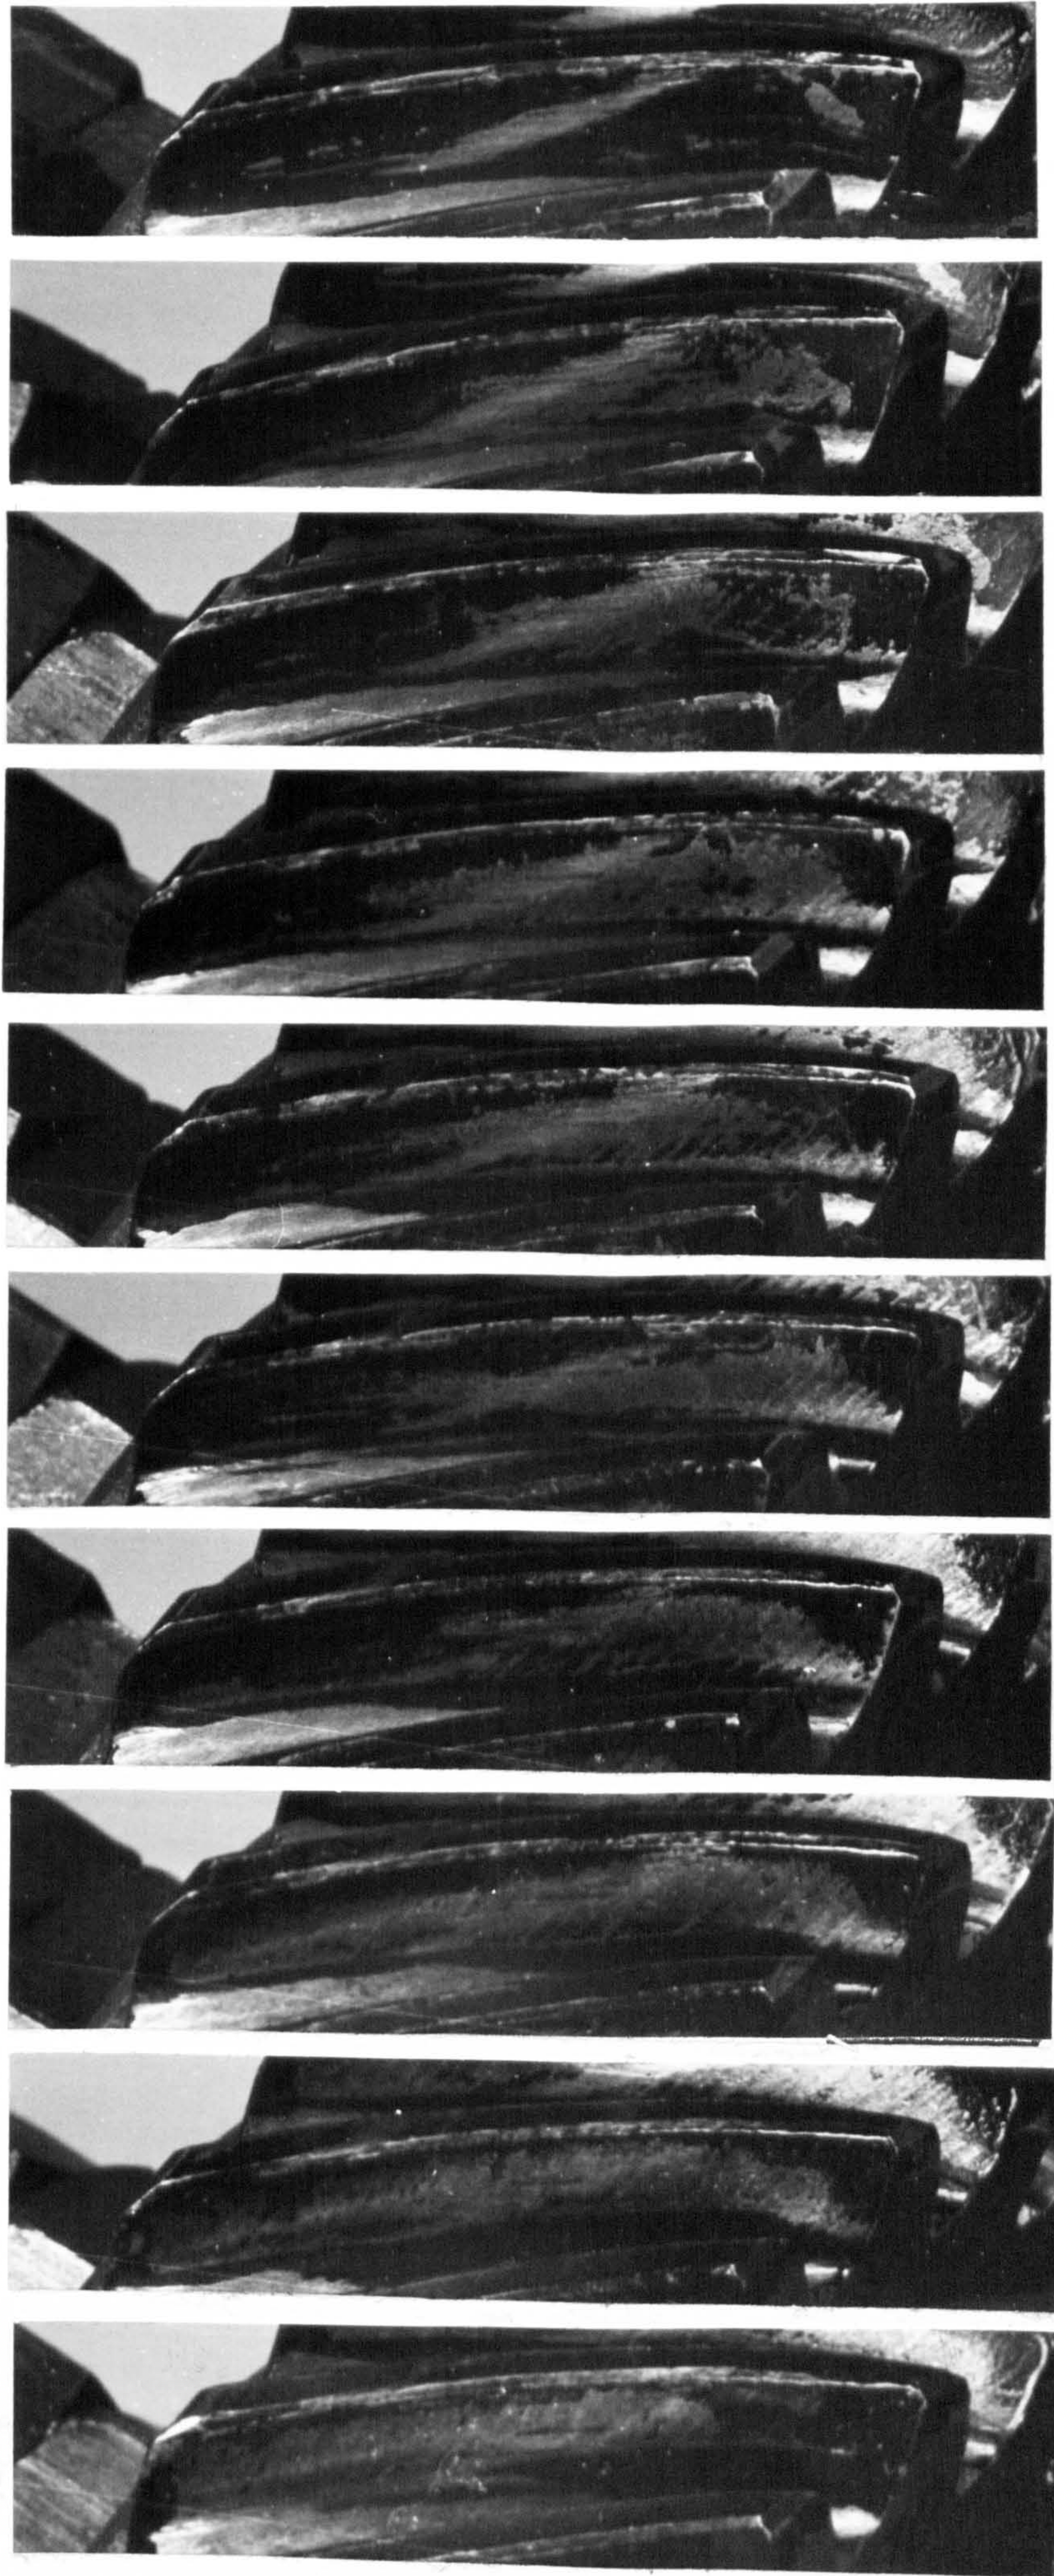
(c) Reverse Tooth Faces, numbers 1 - 10
